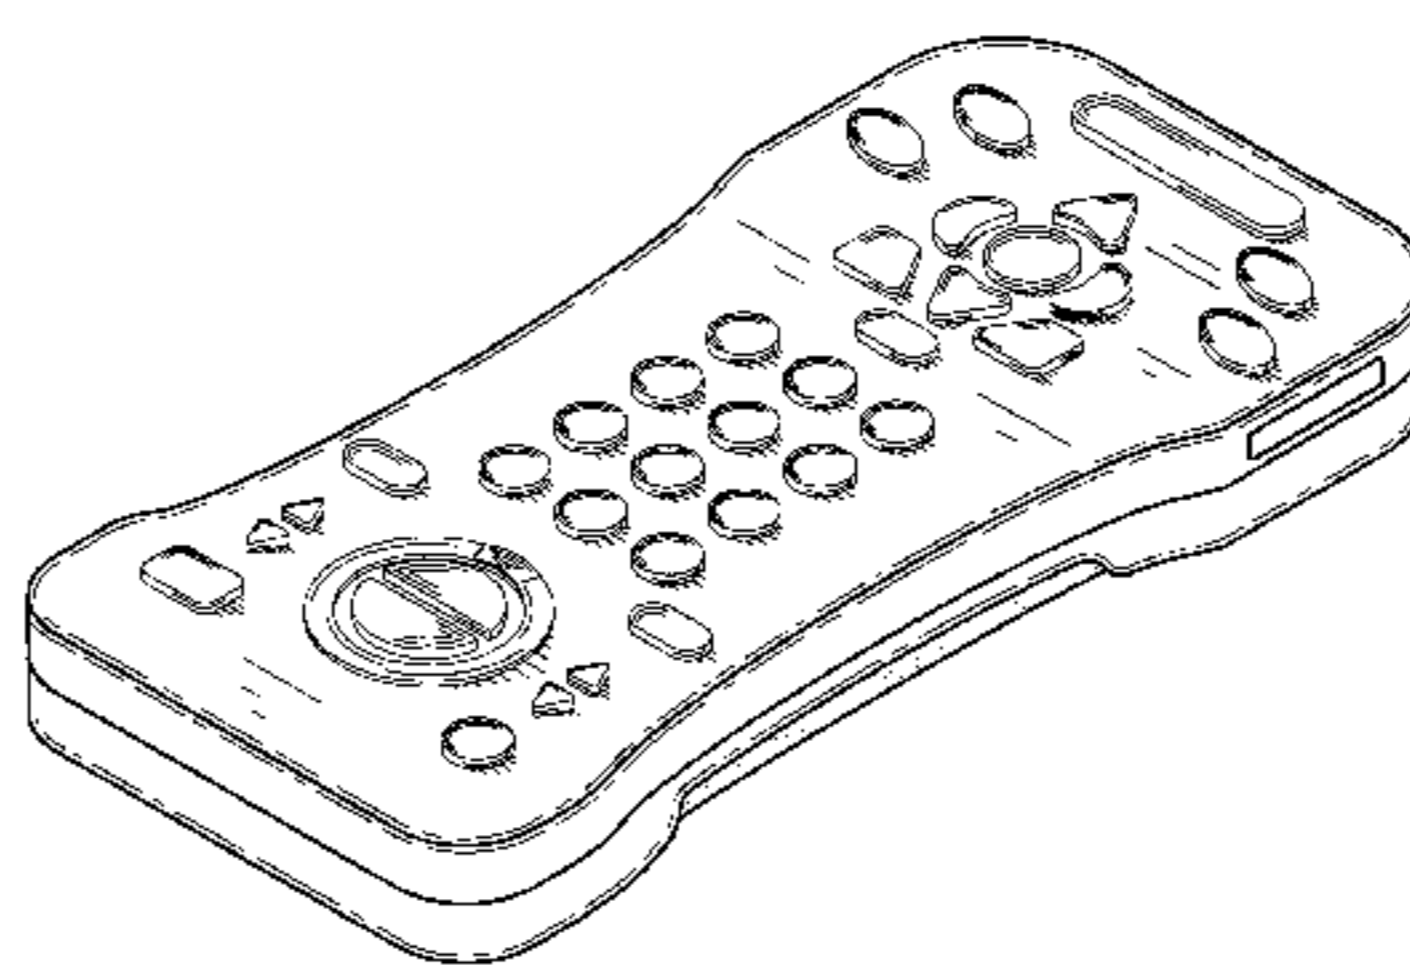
is a perspective view showing the top, rear and right sides of our handheld television/internet remote control; FIG. 2 is a top view thereof; FIG. 3 is a top view thereof in an open position; FIG. 4 is a right side view thereof in a closed position; FIG. 5 is a left side view thereof in a closed position; FIG. 6 is a front end view thereof in a closed position; FIG. 7 is a front end view thereof in an open position; FIG. 8 is a rear view thereof in an open position; FIG. 9 is a rear view thereof in a closed position; FIG. 10 is a cross sectional view taken along line 10—10 of FIG. 3; and, FIG. 11 is a bottom view thereof.
